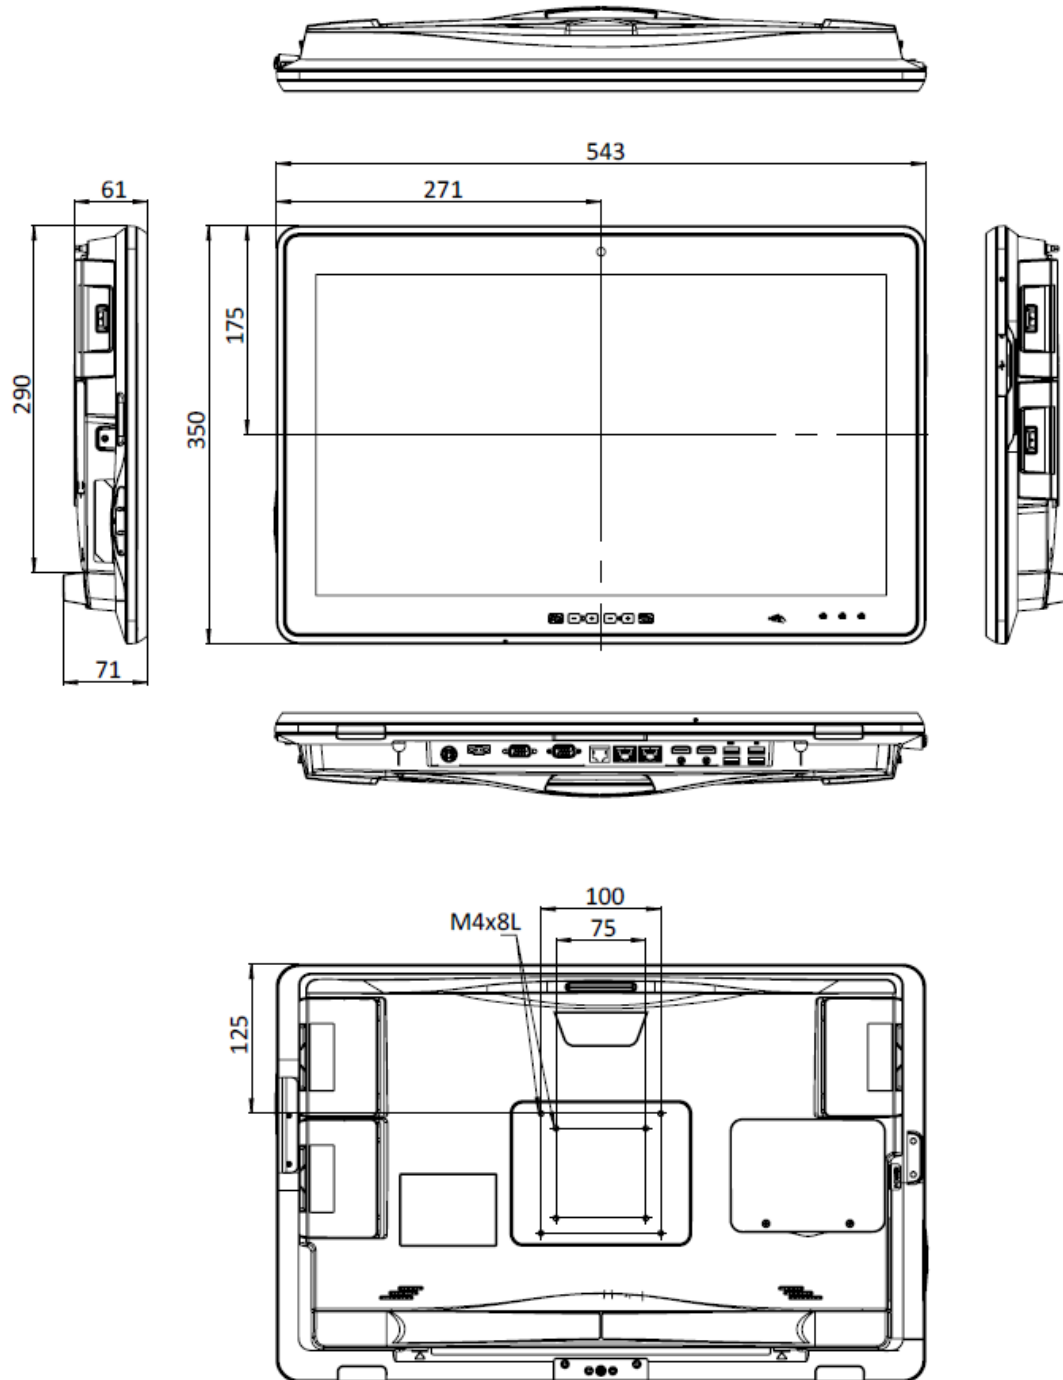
POCm-W22C-RPL Dimensions (mm)
